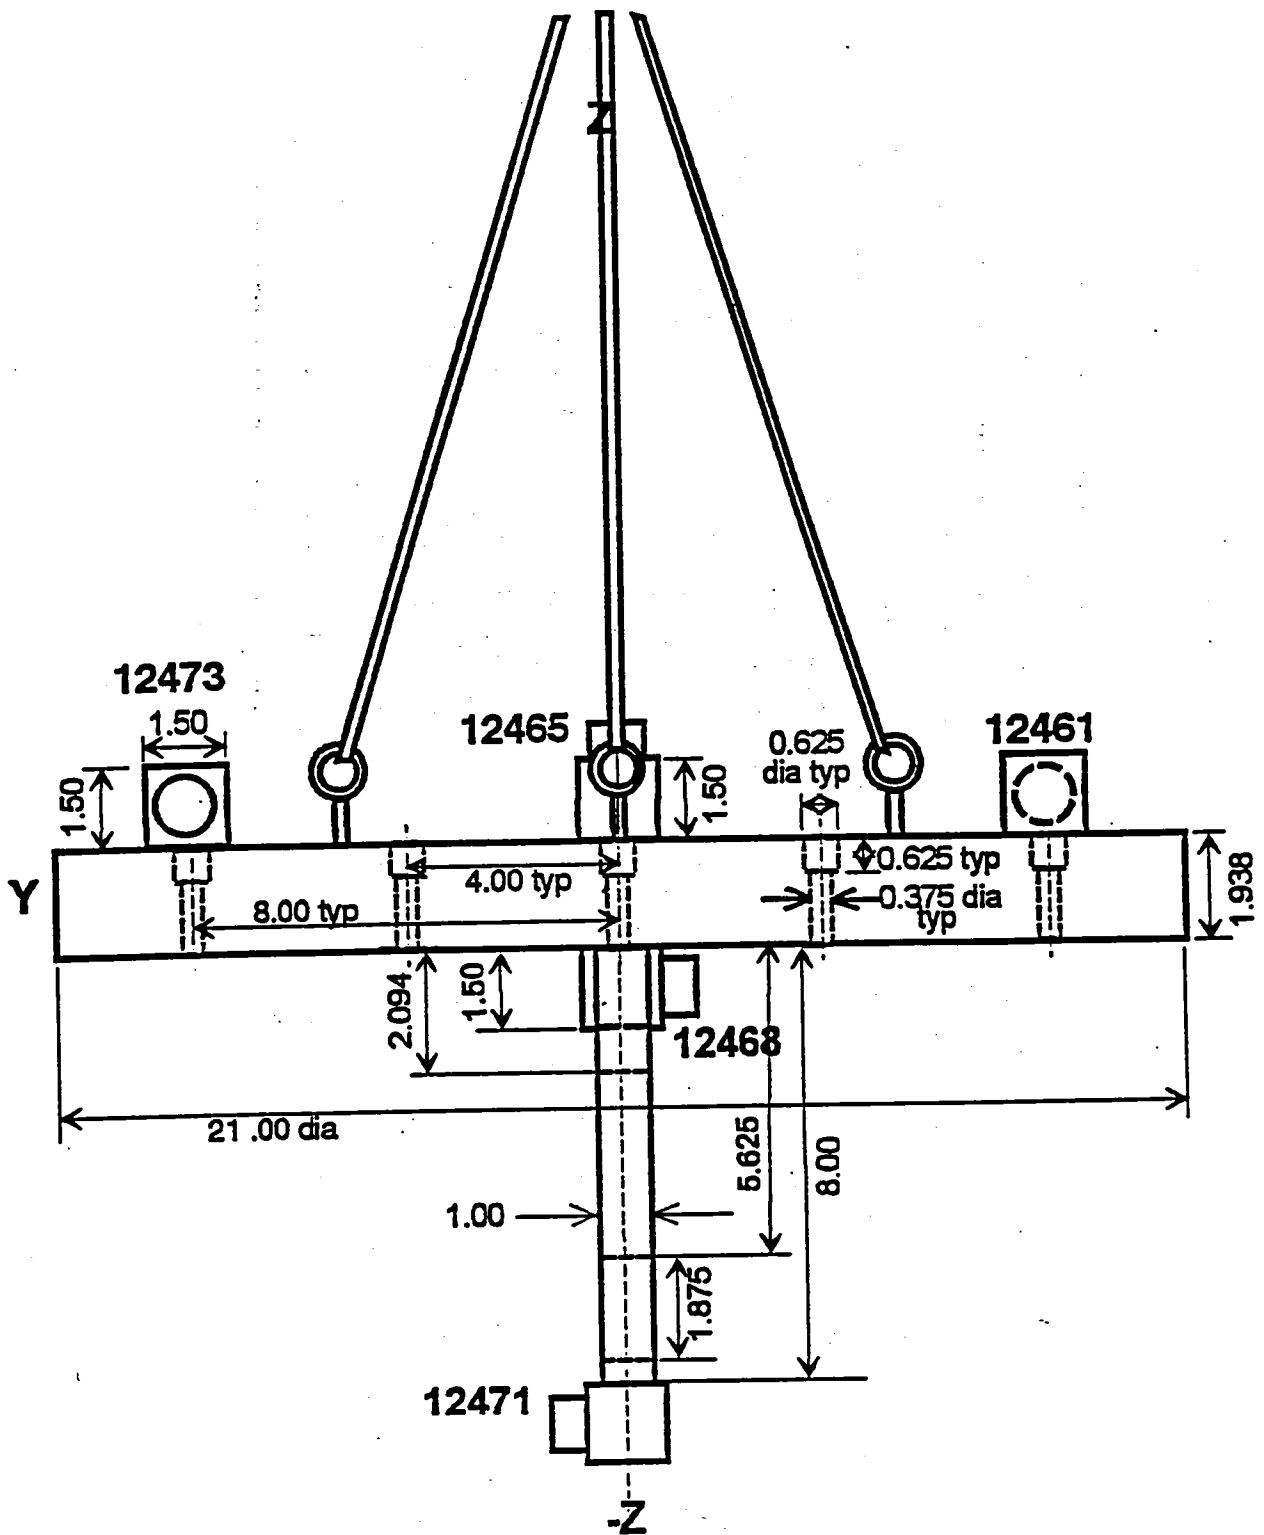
Detailed Drawing of Test Apparatus Platform with Accelerometers
